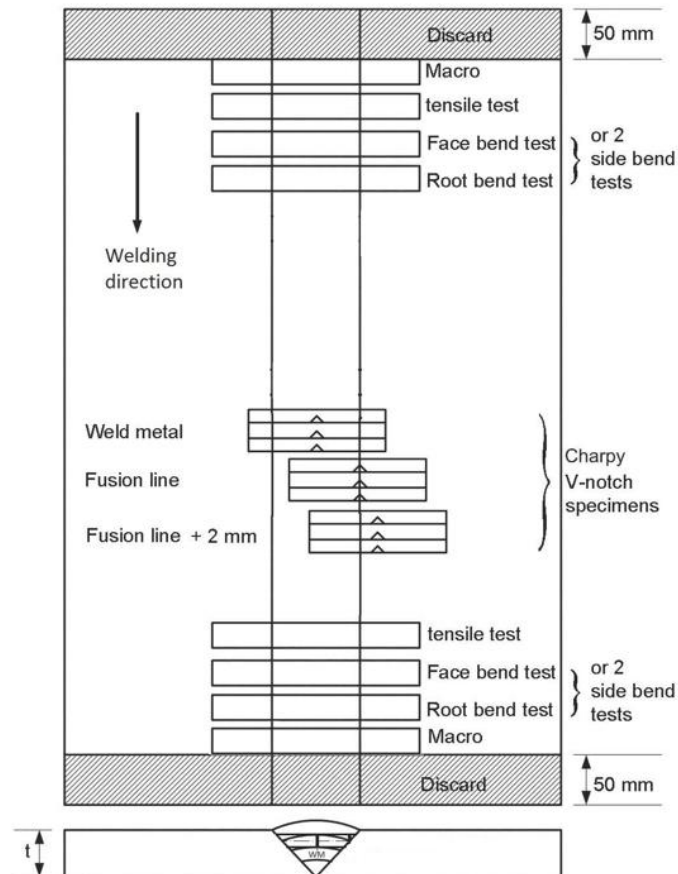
TYPICAL LOCATION OF TEST PIECES
